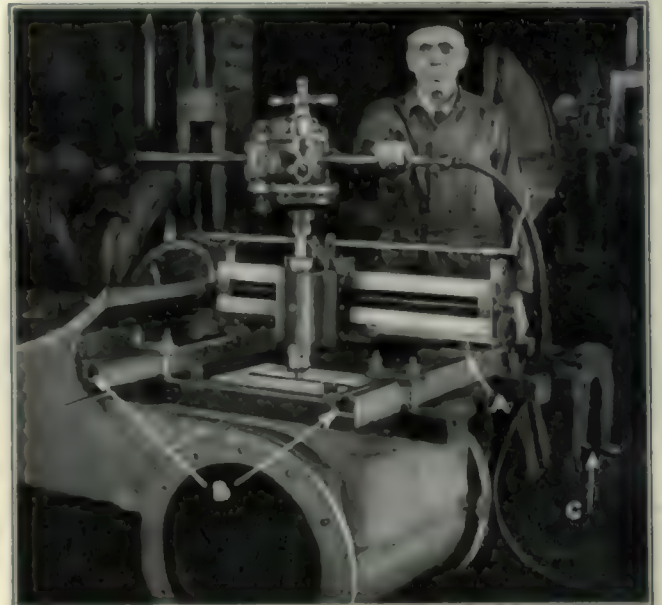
MILLING PORTS IN SLIDE-VALVE CYLINDERS
